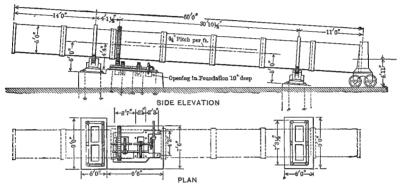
Plan and elevation of 60-foot rotary kiln. (Engineering News.)
